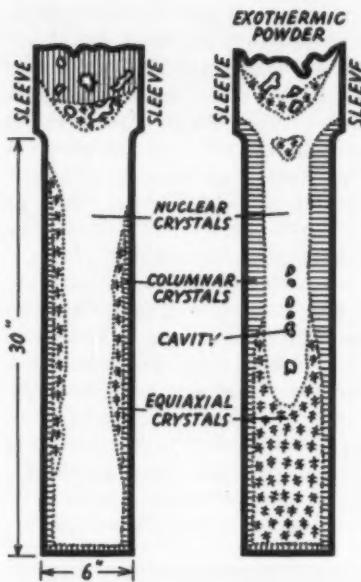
Schematic diagram showing macrostructures of two bar castings poured in the same mold from a common runner. 0.35 per cent carbon steel; dry sand mold. (Gray)¹⁸
